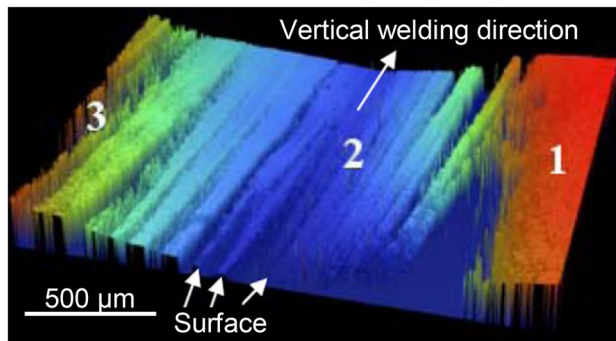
Ordinary weld surface topography, which is extending from the base metal to the top metal. The ripples run from the base metal (1) to the lower toe (2) to the weld bead (3) [36]
